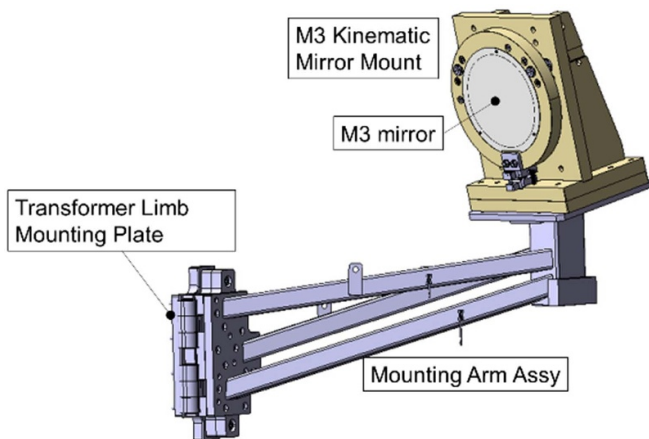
DIR-M3 assembly pointing the main sub-assemblies.
